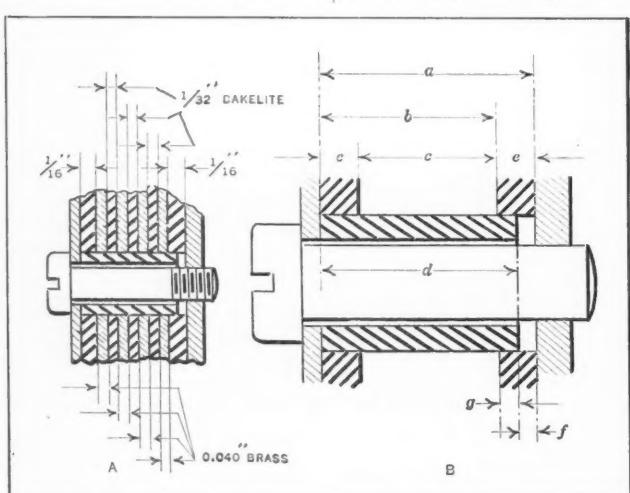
Electrical Assembly Requiring Insulating Bushing of Length to Suit Minimum and Maximum Thicknesses
